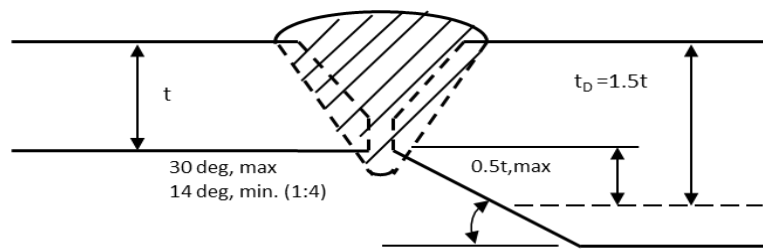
Unequal wall thickness transition joint (Back-beveled joint)
